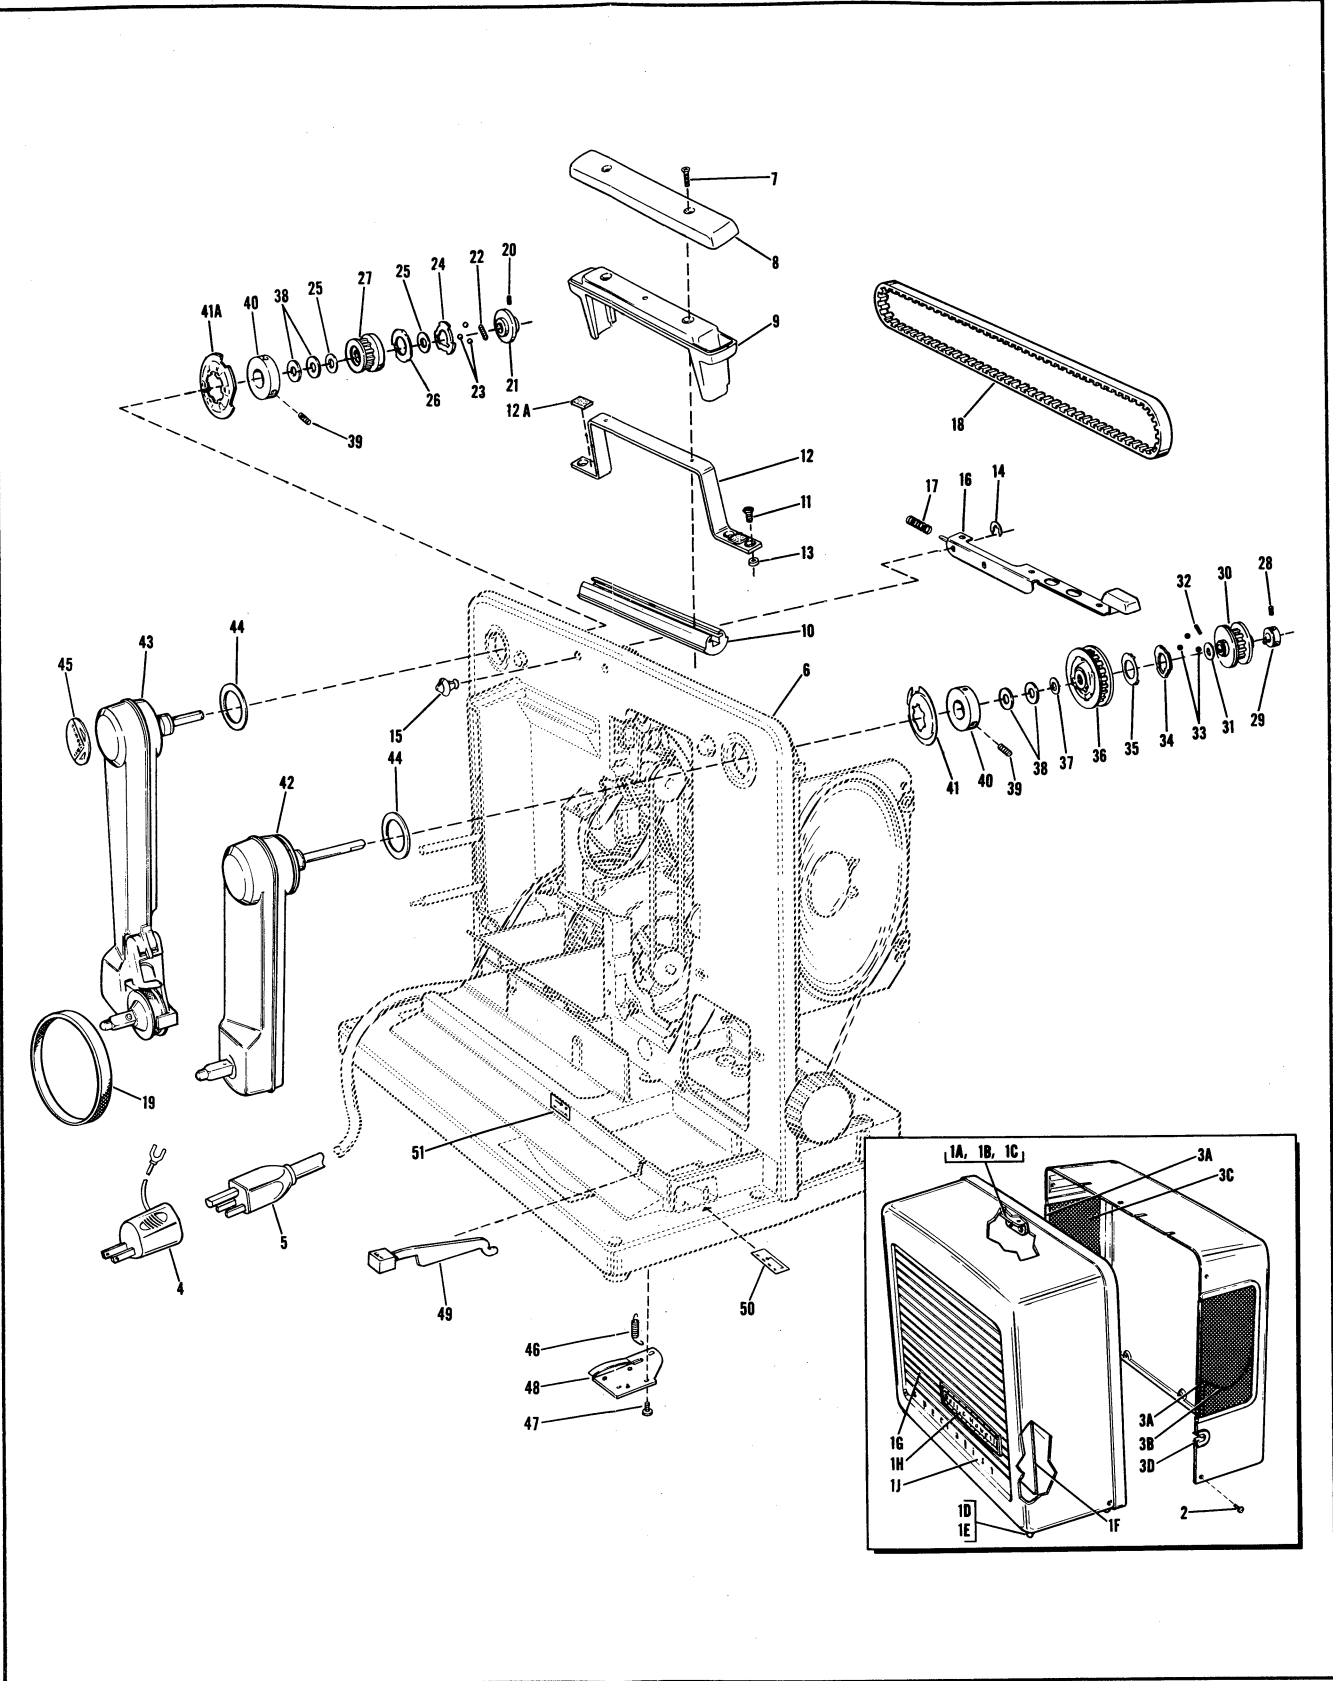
Filmosound Projector Main Plate Exploded (Sheet 1)
